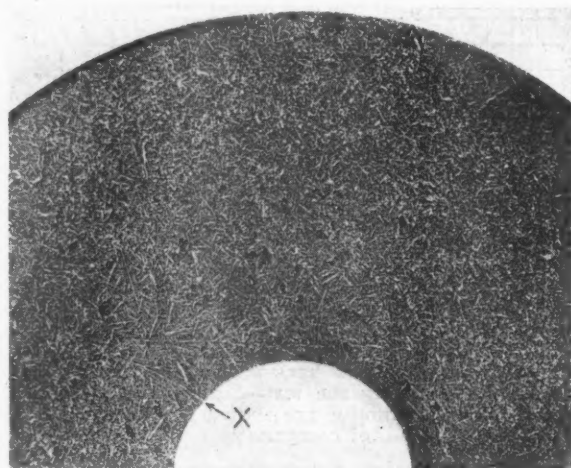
Photograph of a half section of a locomotive crank pin showing the pattern remaining from the original ingot structure
